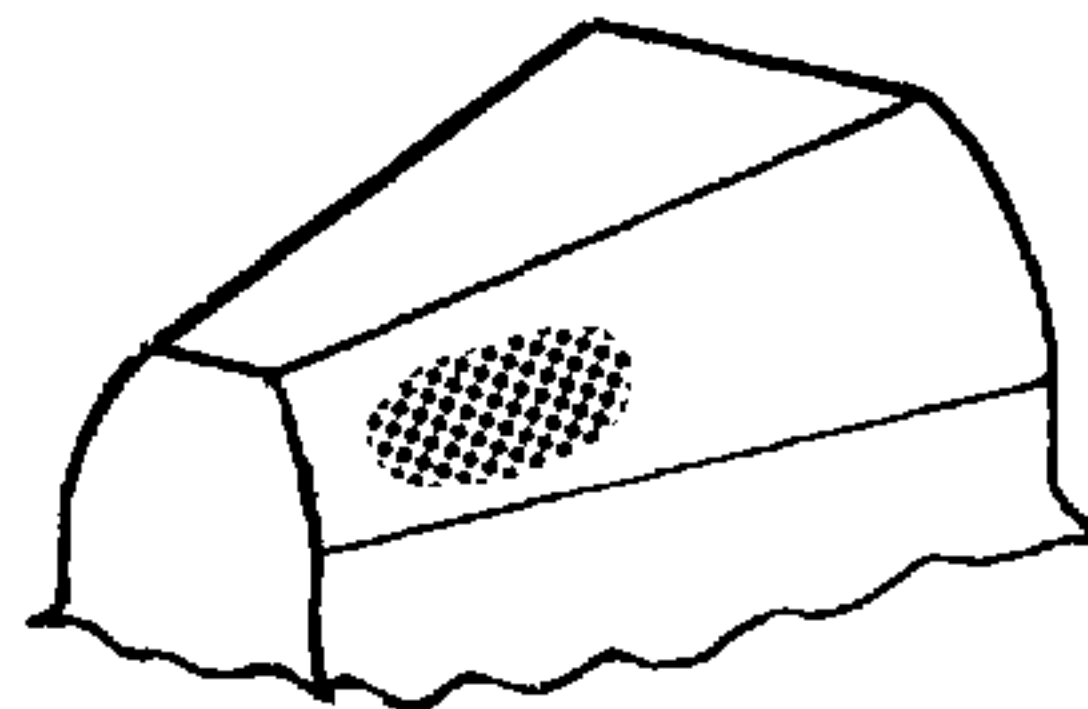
Ideal Ring Gear Tooth Contact Pattern.
